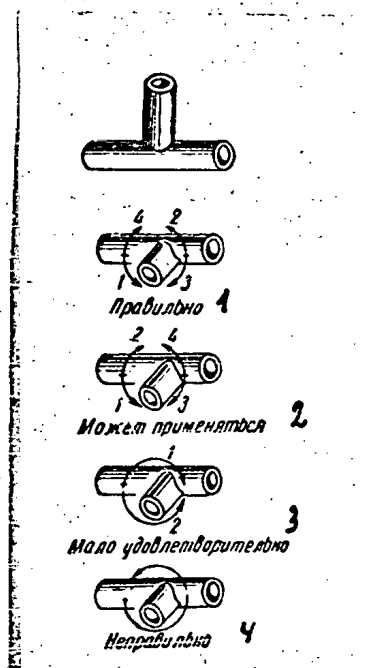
Working order in welding a connection tube to a main tube
